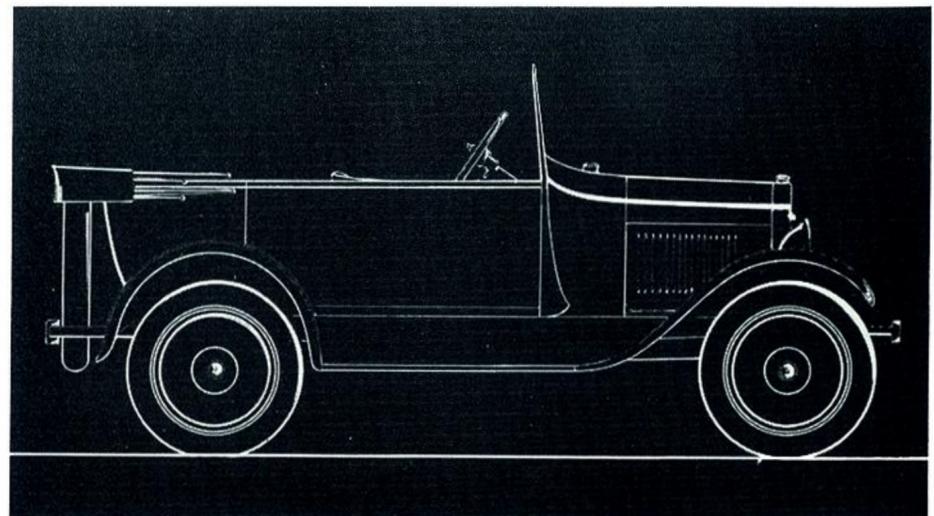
Revised blackboard drawing, date: 12/16/26
